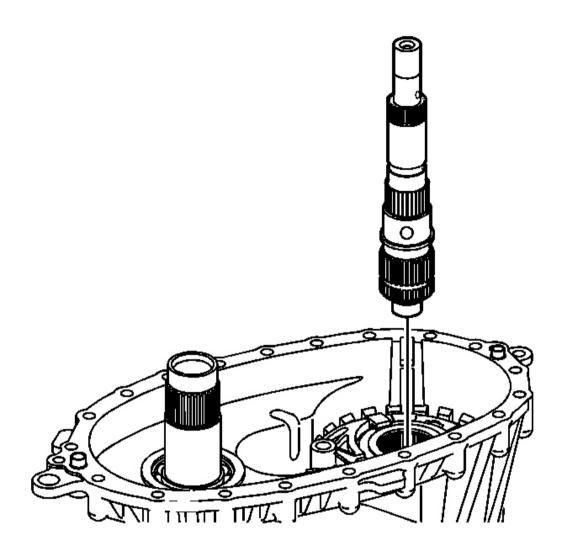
View Of Mainshaft Courtesy of GENERAL MOTORS CORP.
